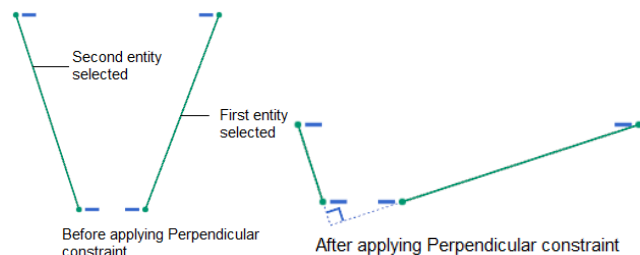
Sketch before and after applying the Perpendicular constraint
